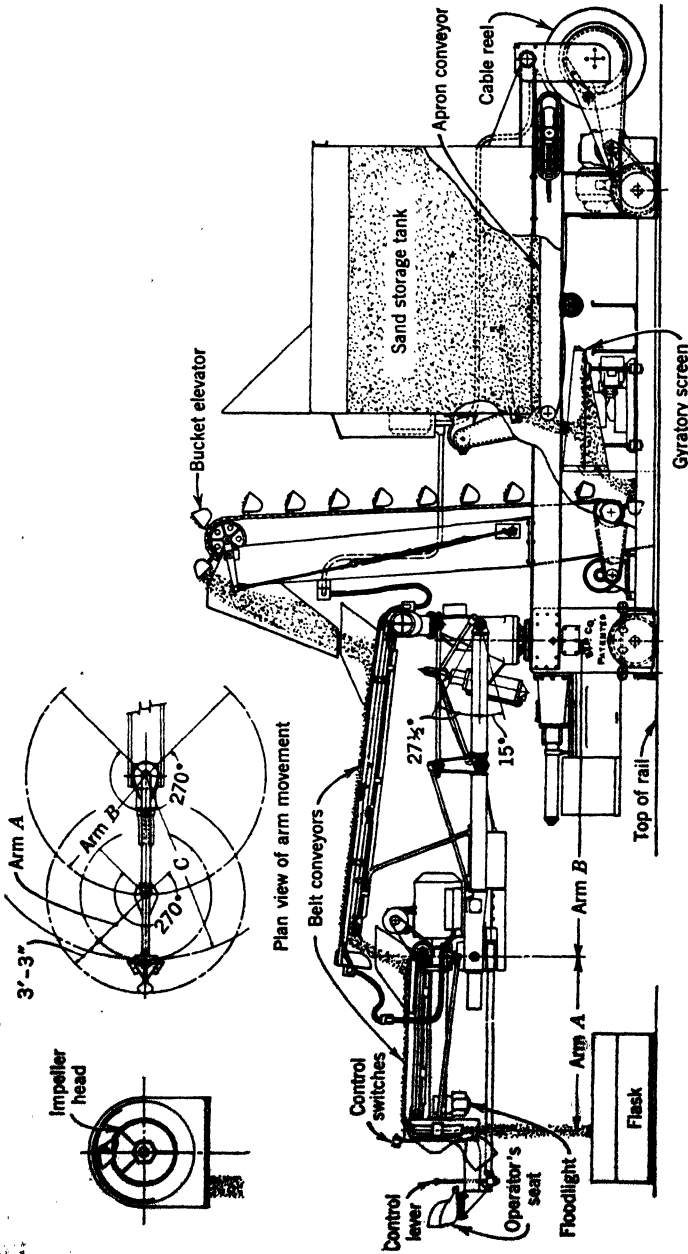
Schematic view of a motive Speedslinger, illustrating the movement of sand from storage bin to flask. (Courtesy of Beardsley & Piper Co., Chicago, Ill.)
